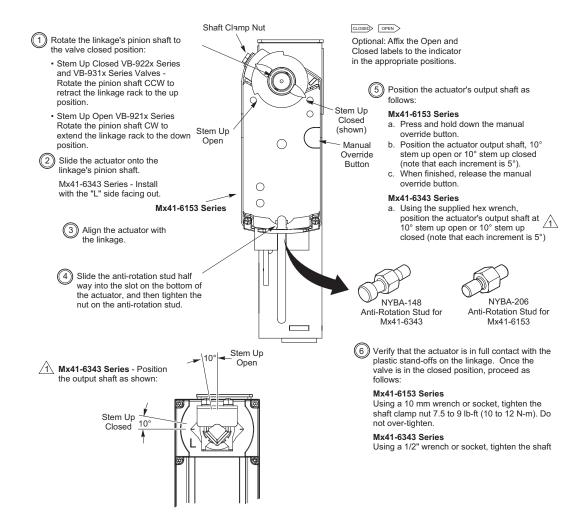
Mounting Mx41-6153 Series or Mx41-634x Series Actuator and Setting Up Actuator/Linkage/Valve
